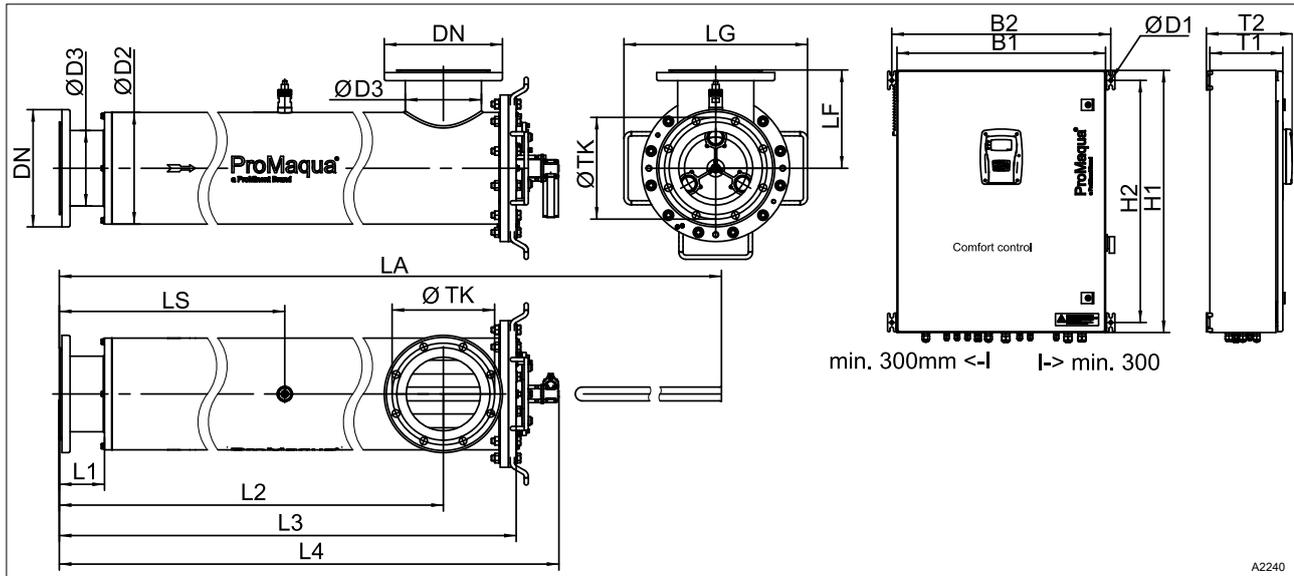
Dimensional drawing Dulcodes LP 1 ... 4x350W. with automatic wiper
